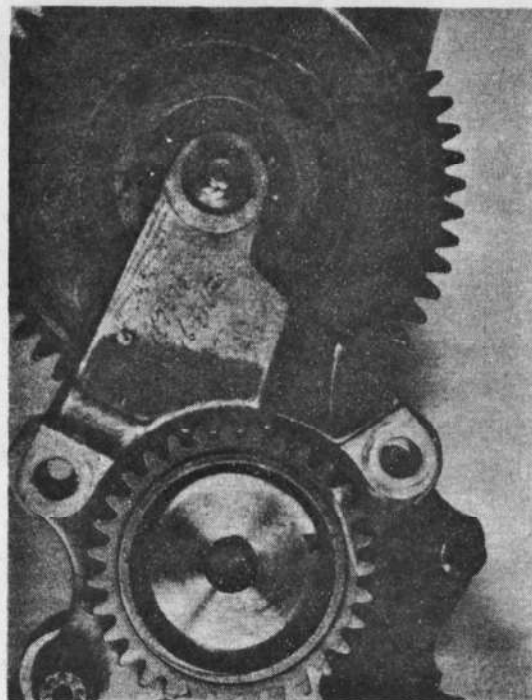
Imprint Marks on Right Torque Sensor Assembly
